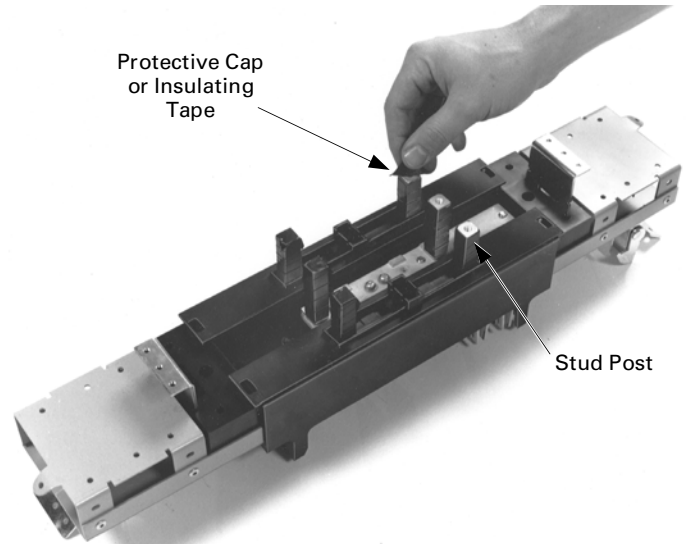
Removing the cap or tape from the stud posts of the breaker module.
